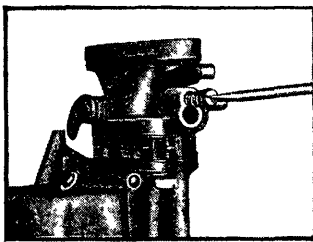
Install idle adjustment screw and spring. Back out from seated position to specifications
